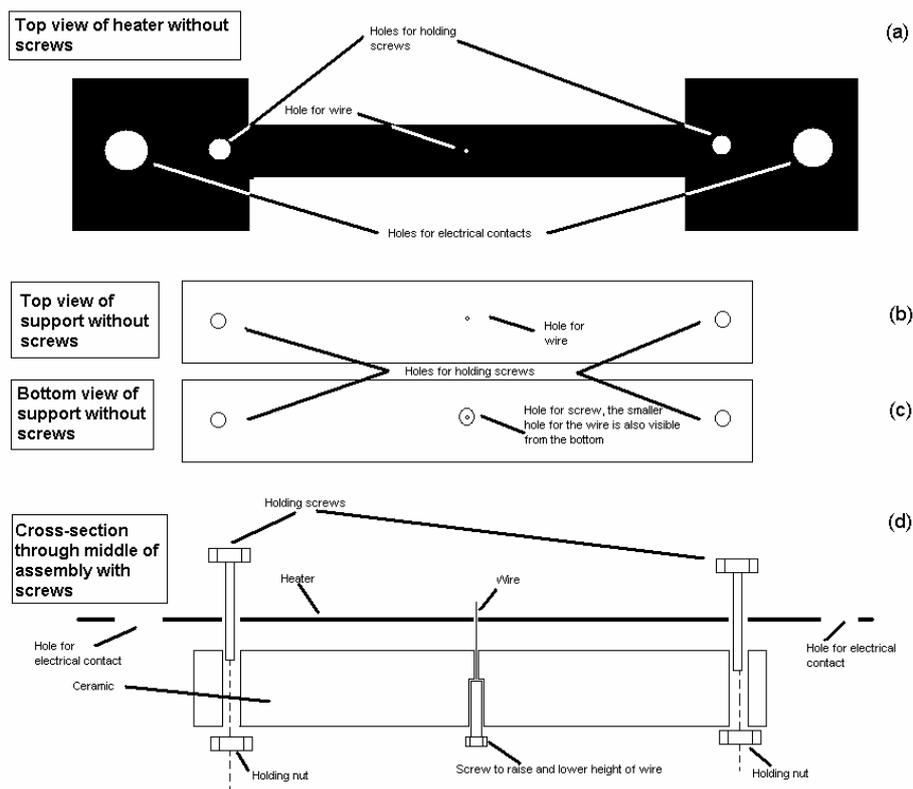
The sharp wire heater. (a) top view of the graphite heater, (b) top view of the support without screws, (c) bottom view of the support without screws and (d) how the assembly fits together in cross-section. All screw holes are threaded.
